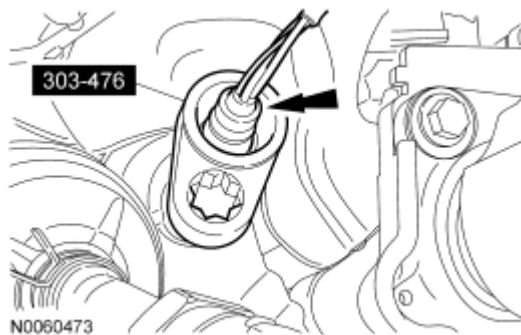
Identifying RH Catalyst Monitor Sensor & Special Tool (303-476)
